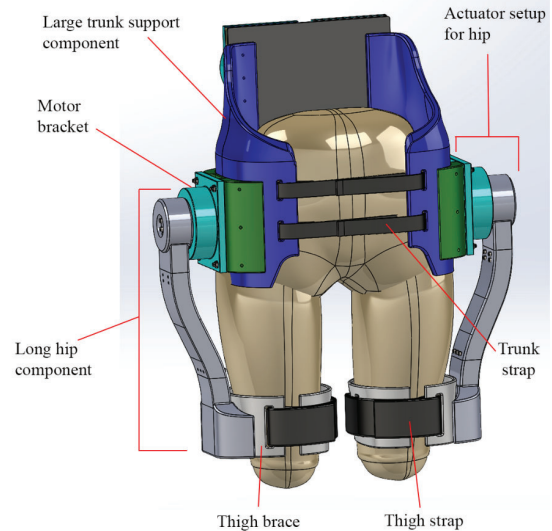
CAD model of the developed hip exoskeleton: Front Isometric View
